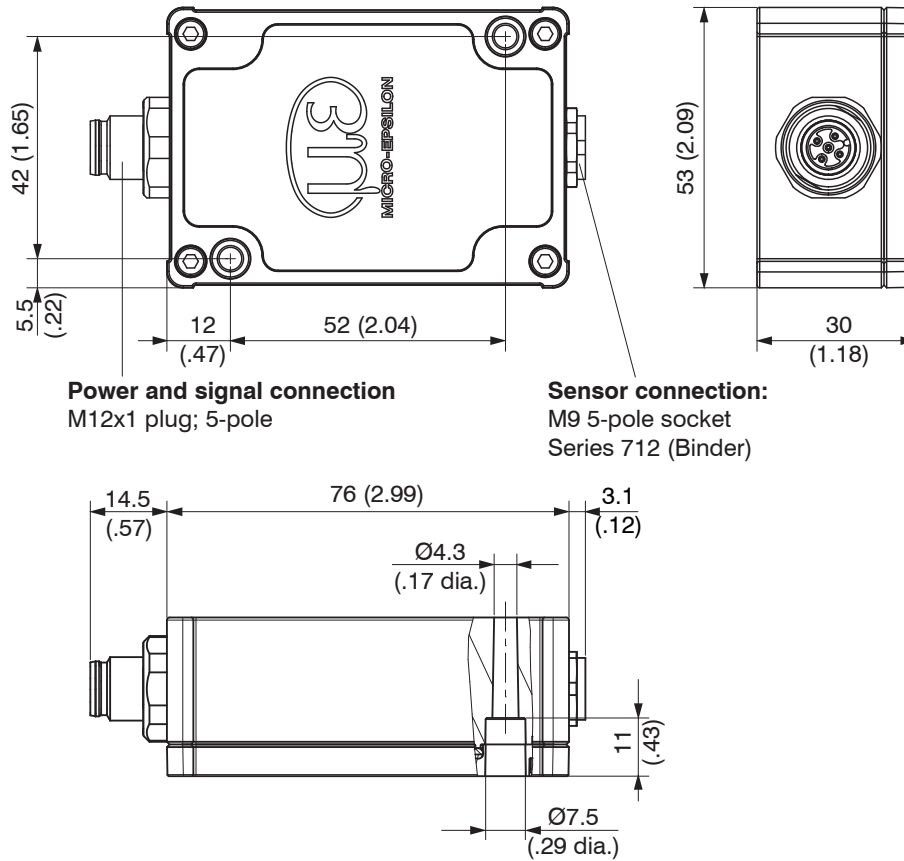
Dimensions of MSC7401(010) controller, dimensions in mm (inches), not to scale
